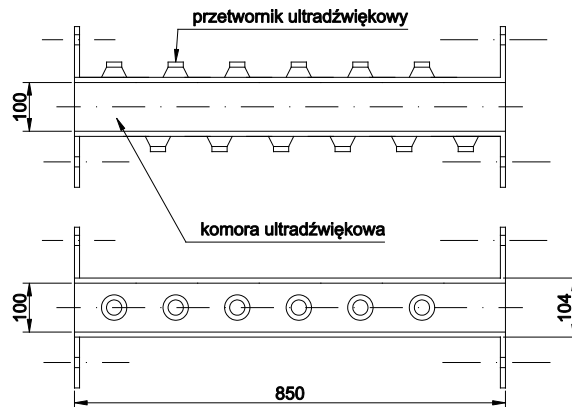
Construction of a single segment of the ultrasound disintegrator
